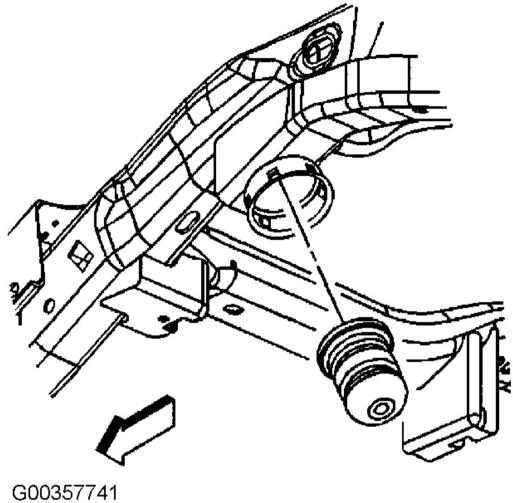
Removing Spring Bumper Courtesy of GENERAL MOTORS CORP.
